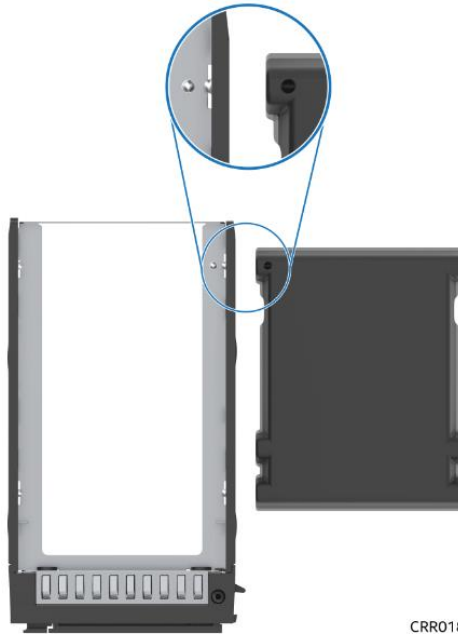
2.5" Drive carrier assembly – drive installation into carrier
